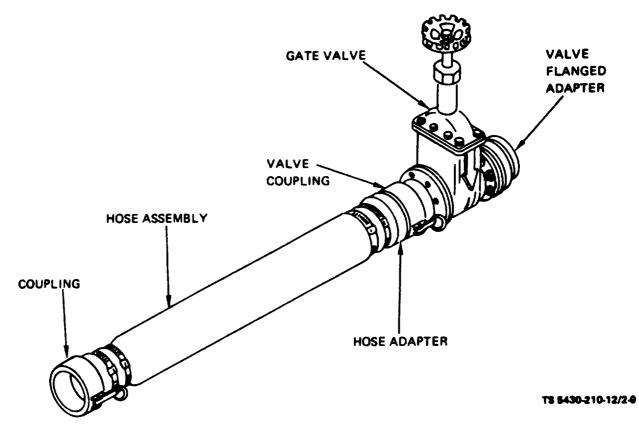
Filler and Discharge Hose and Control Valve Assembly (3,000, 20,000, and 50,000 Gallon Tank).
